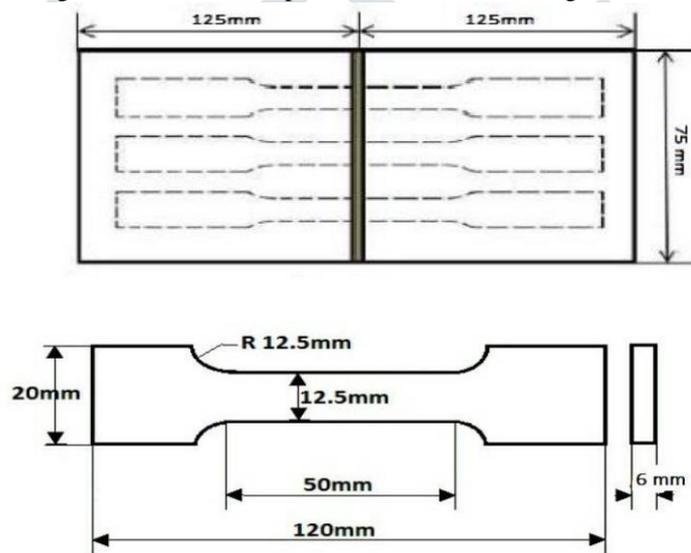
Schematic diagrams for dimensions of specimen for tensile test
